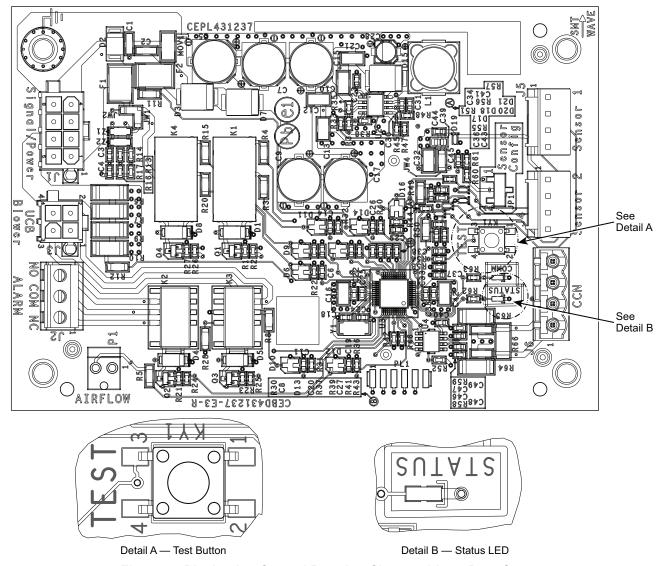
Dissipation Control Board — Shown without Dust Cover
